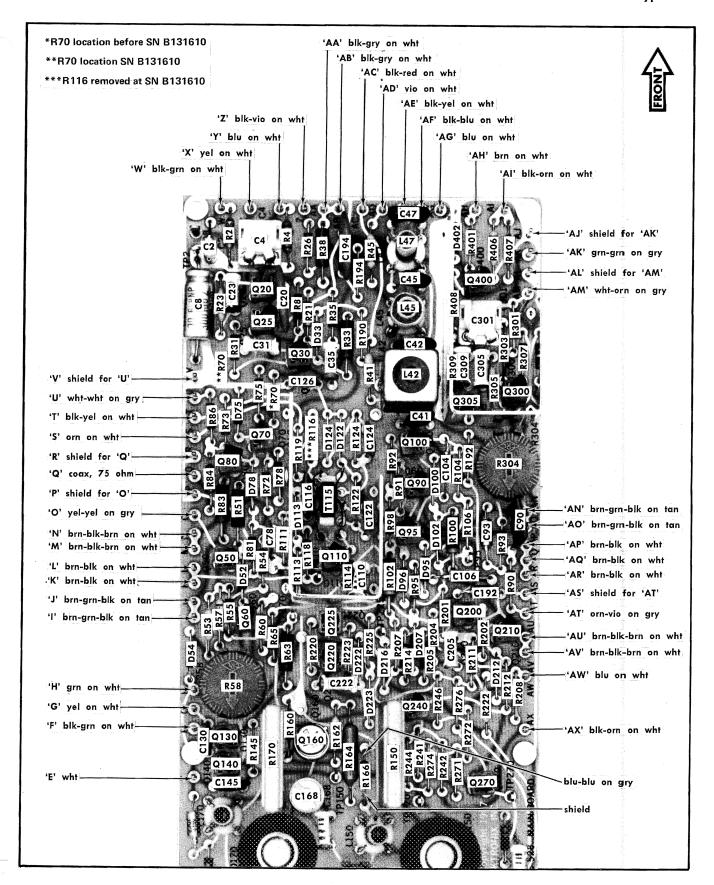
B. Partial top view of Main board showing components and wire color codes for instruments below SN B080560.
